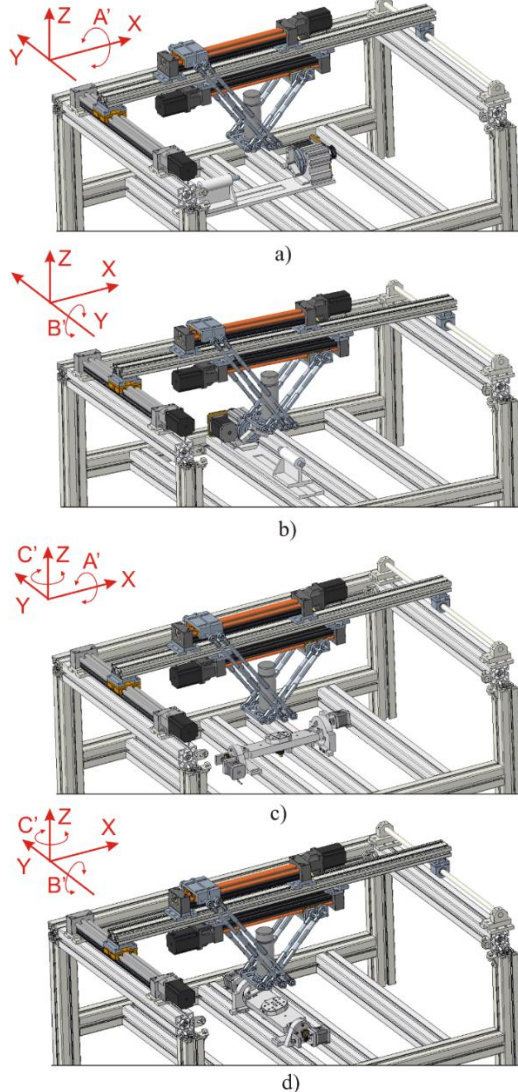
CAD variants of O-X glide hybrid machine tools with rotary axes
